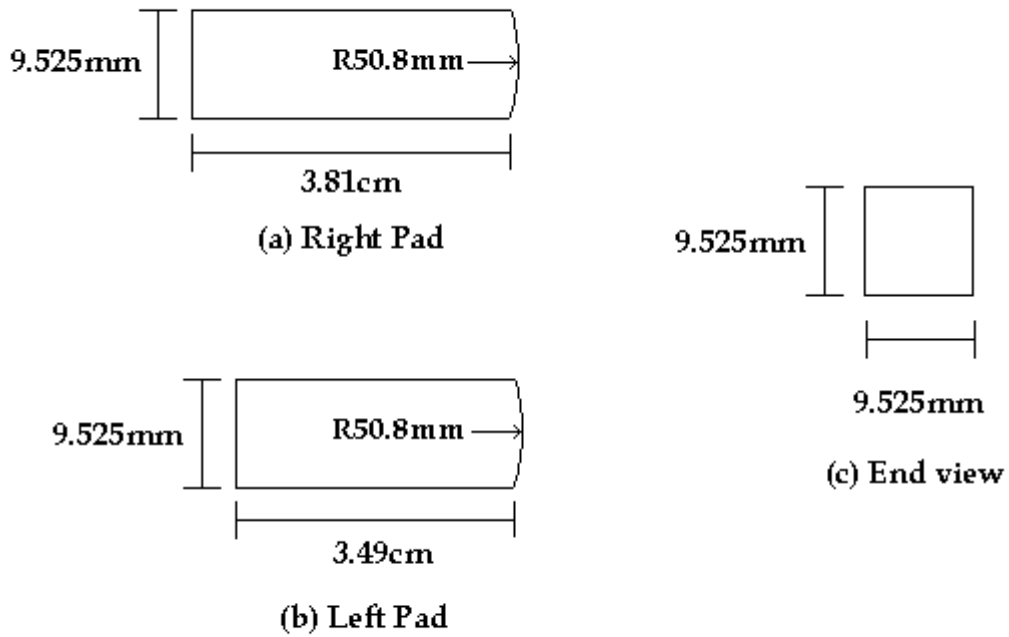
Fretting Pad Dimensions; (a) Right, (b) Left, and (c) End View
